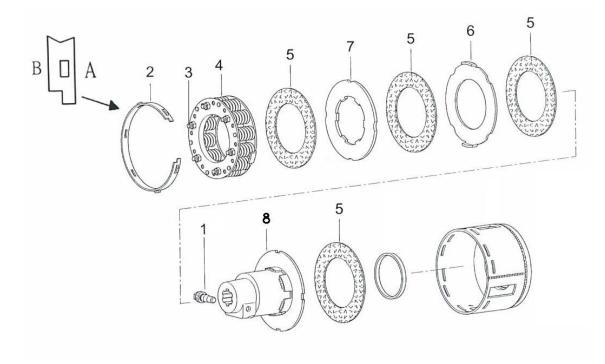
PLATE-TYPE CLUTCH (EXPLODED)
